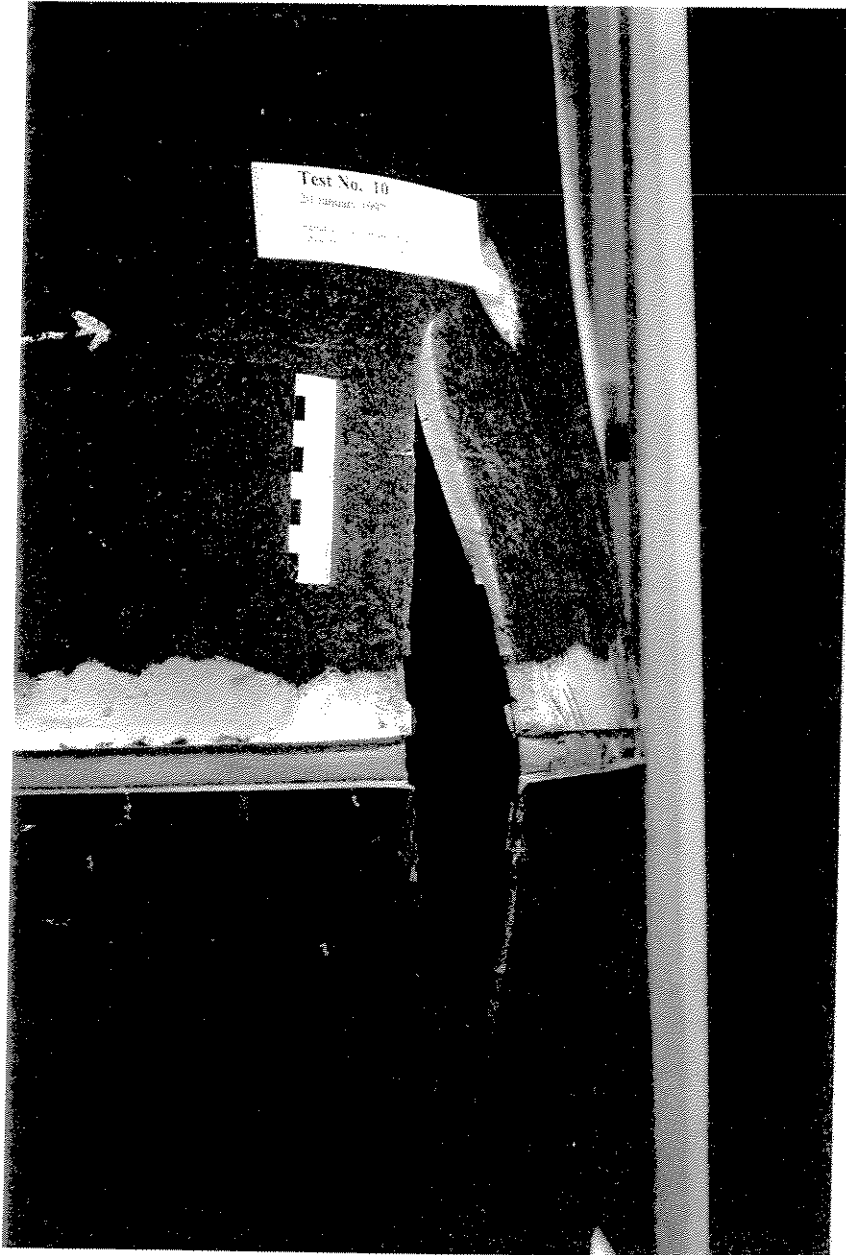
Picture of the test specimen no. 10 after the burst test
